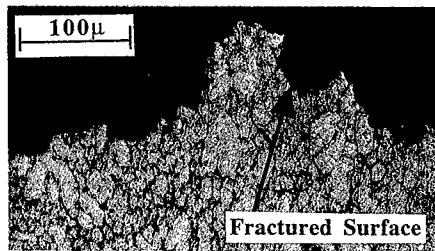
Cross section of fractured die cast AM60 tensile bar.
